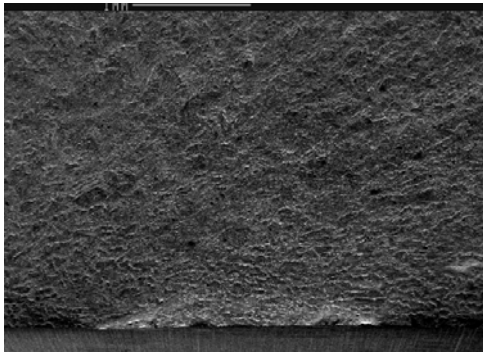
Fracture surface showing multiple initiation sites.
